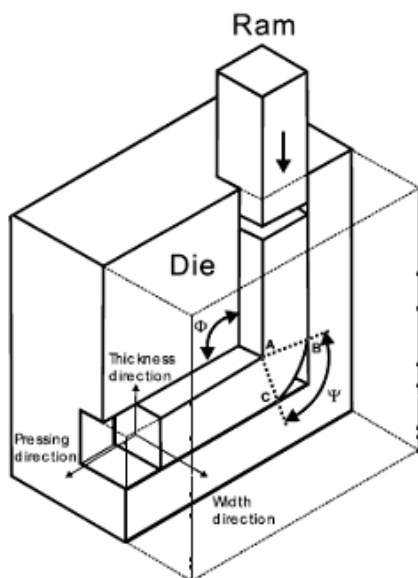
Schematic view of Equal Channel Angular Pressing Extrusion
